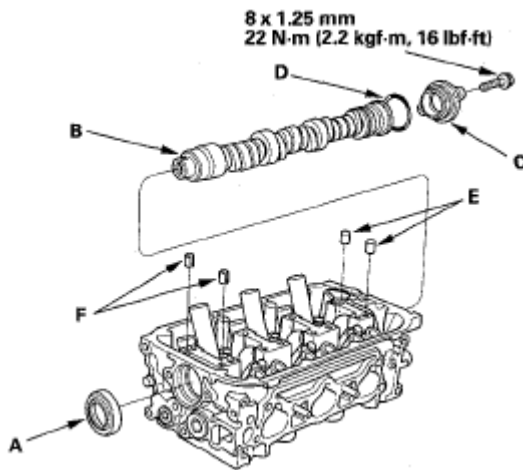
Identifying Camshaft Components - Rear With Torque Specifications
